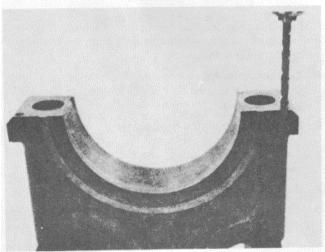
C-11. Drill the Main Bearing Cap Dowel Hole
